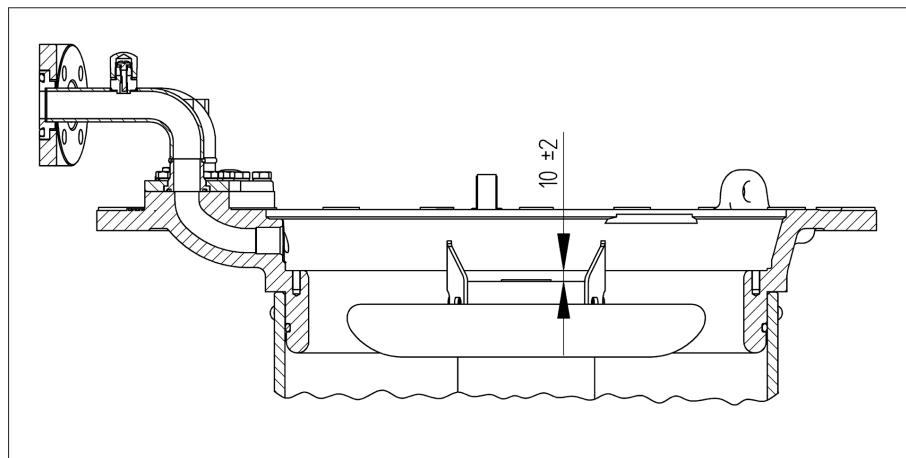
Distance between the upper edge of the coupling tube and the on-load tap-changer head flange
